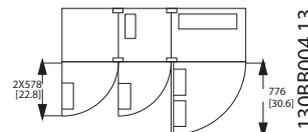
Front Clearance of IP21/IP54 Enclosure Type, Frame Size F3
